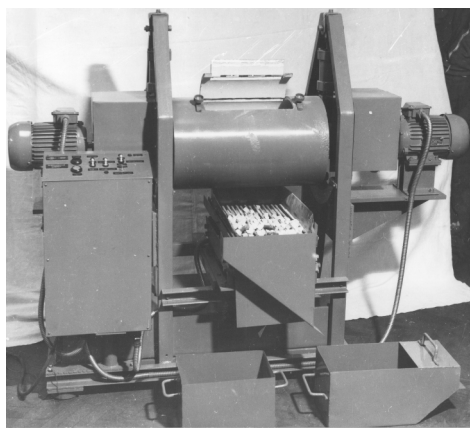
Unbalanced vibratory machine with the separator and two drives
